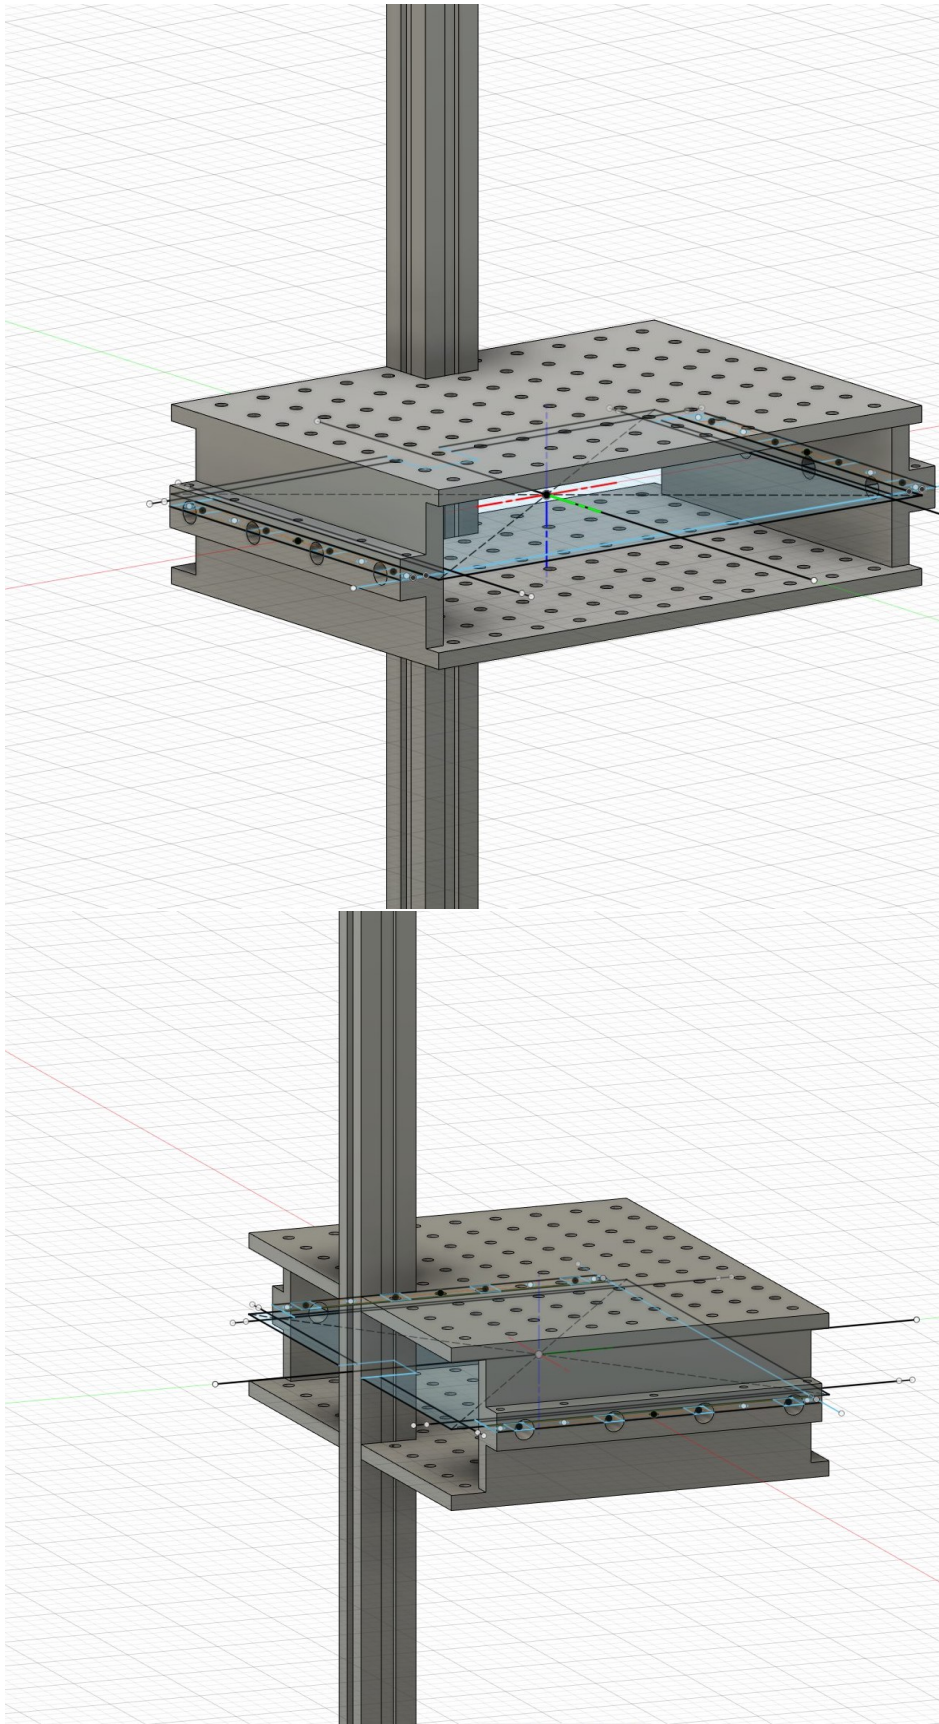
The most recent CAD design of the camera holder(1 and 2 point of views).
